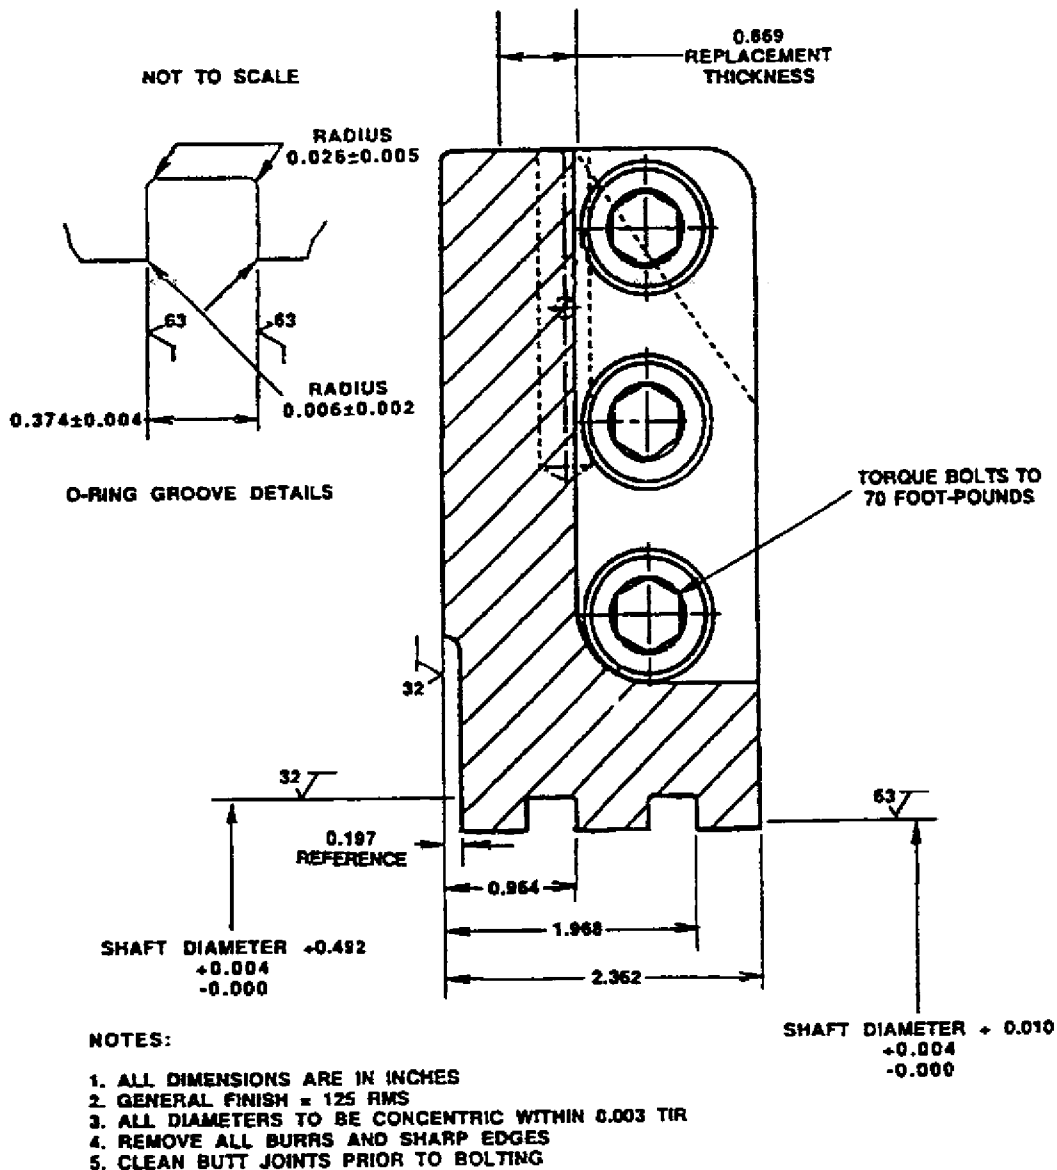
Machining Details for the Seat (AOE 6 Class)
